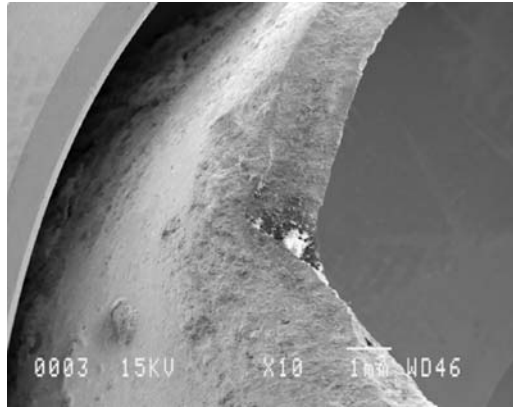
Fractography of failure surface, $\times 10$
